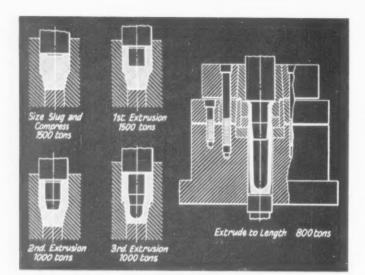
Consecutive operations in the cold extrusion of 105millimeter shells are shown with their required pressures.
